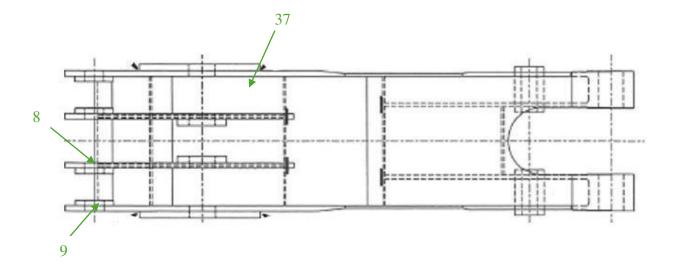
EXTERNAL STICK LEFT SIDE WALL
